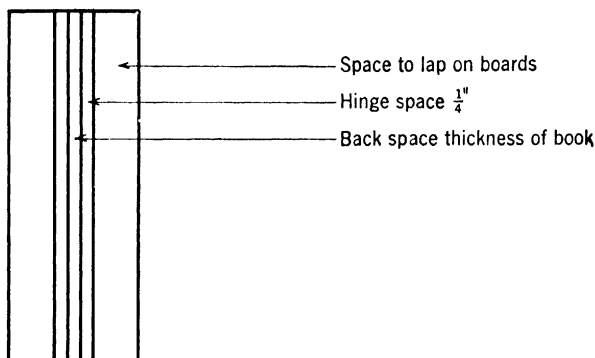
Book Linen Ruled Ready to Apply the Boards
